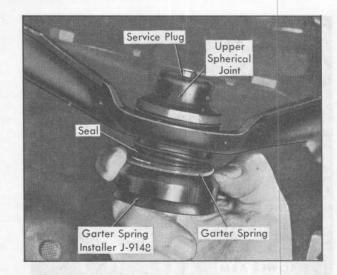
Installing Garter Spring On Upper Spherical Joint Seal
